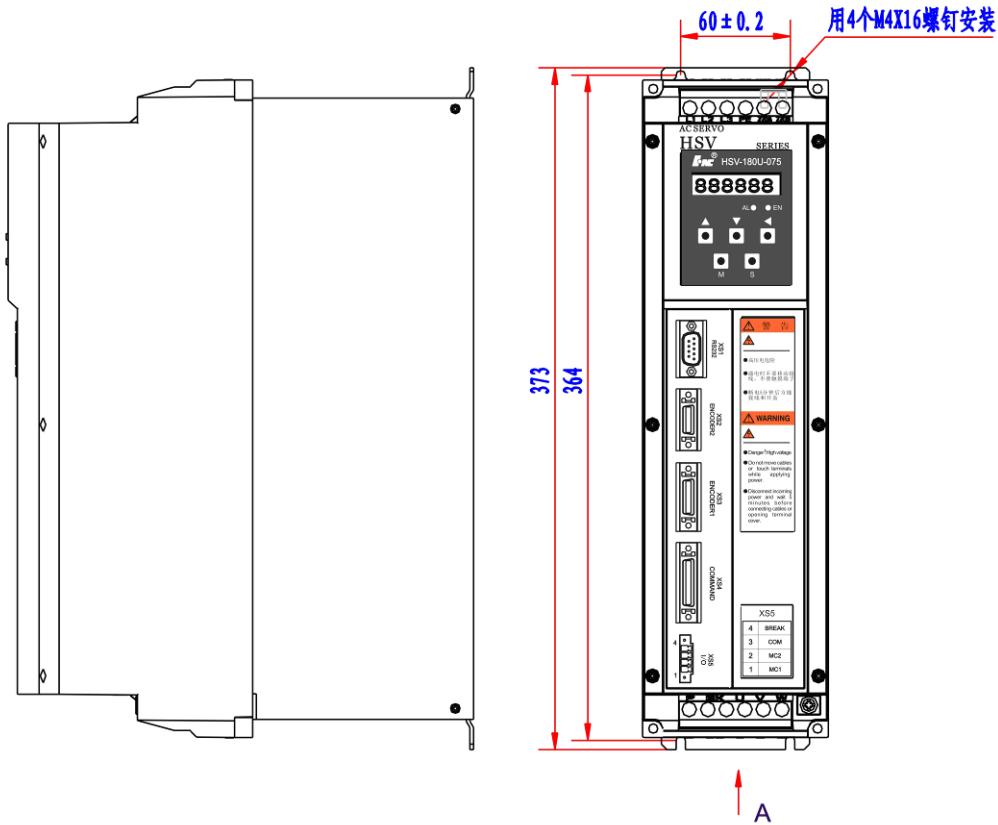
Dimension and size of HSV-180AS-025, 035, 050, 075 (with auxiliary devices) Unit: mm
